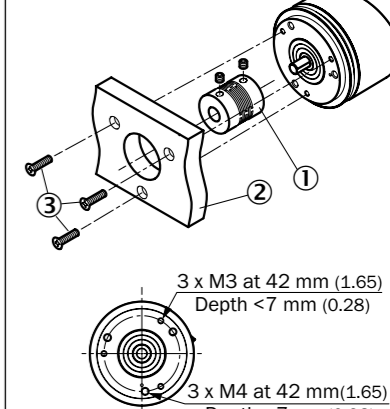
Mounting of DBS60 Core face mount flange via the mounting spigot
